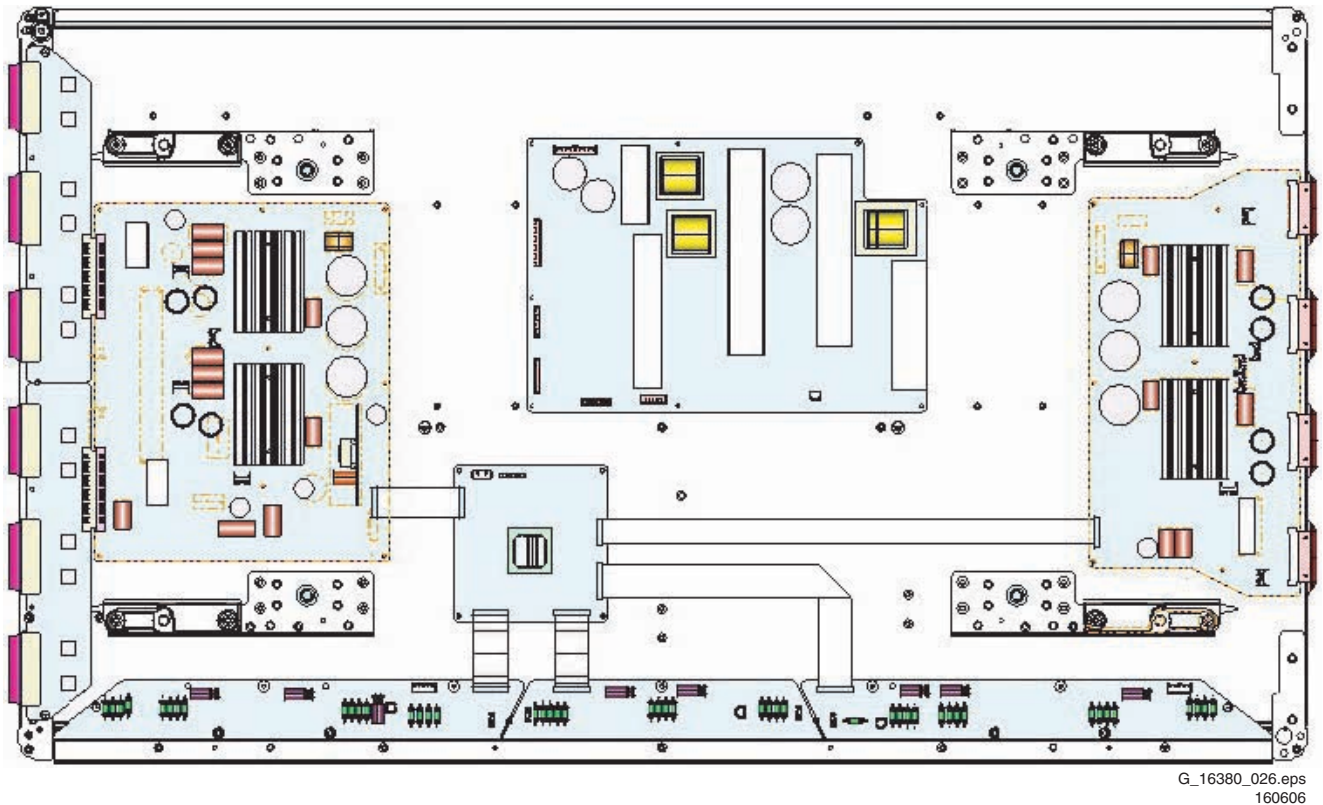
Photo 2 - Exchange of LBE, LBF, LBG board 50" HD w1
